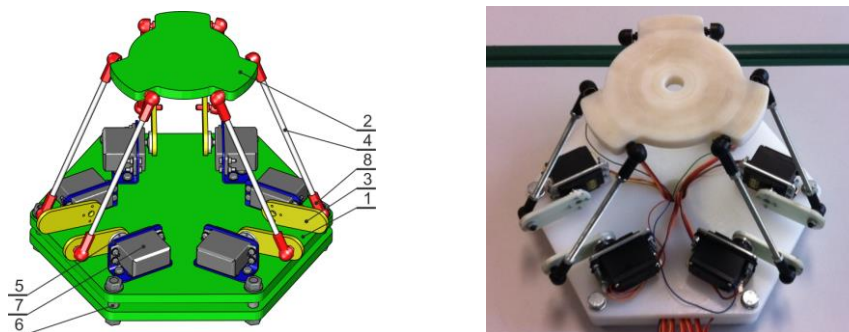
Mechanism . Solid model: 1 – base plate, 2 – moving platform, 3 – lower part of the arm, 4 – upper part of the arm, 5 – drive fixing, 6 – spacing sleeve, 7 – servo-drive, 8 – ball-and-socket joint.
